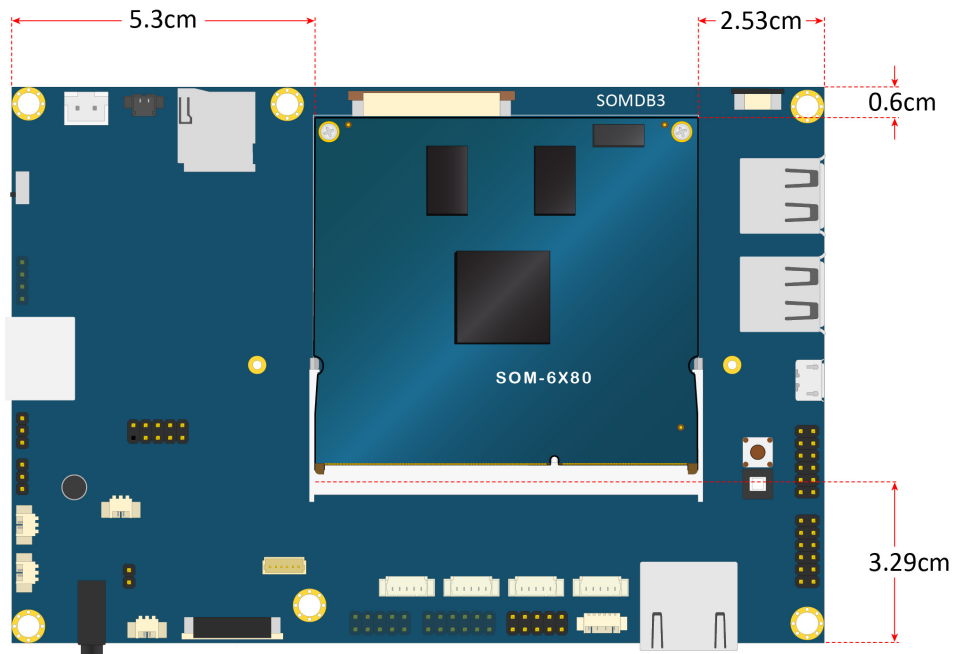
VIA SOM-6X80 module placement on the SOMDB3 carrier board
